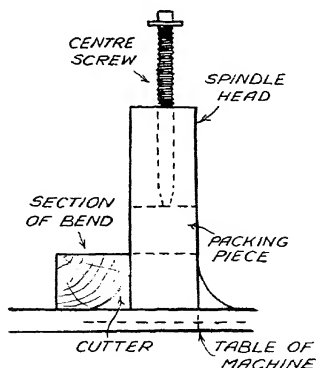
SHOWING CUTTING EDGE UNDERNEATH MEMBER.
